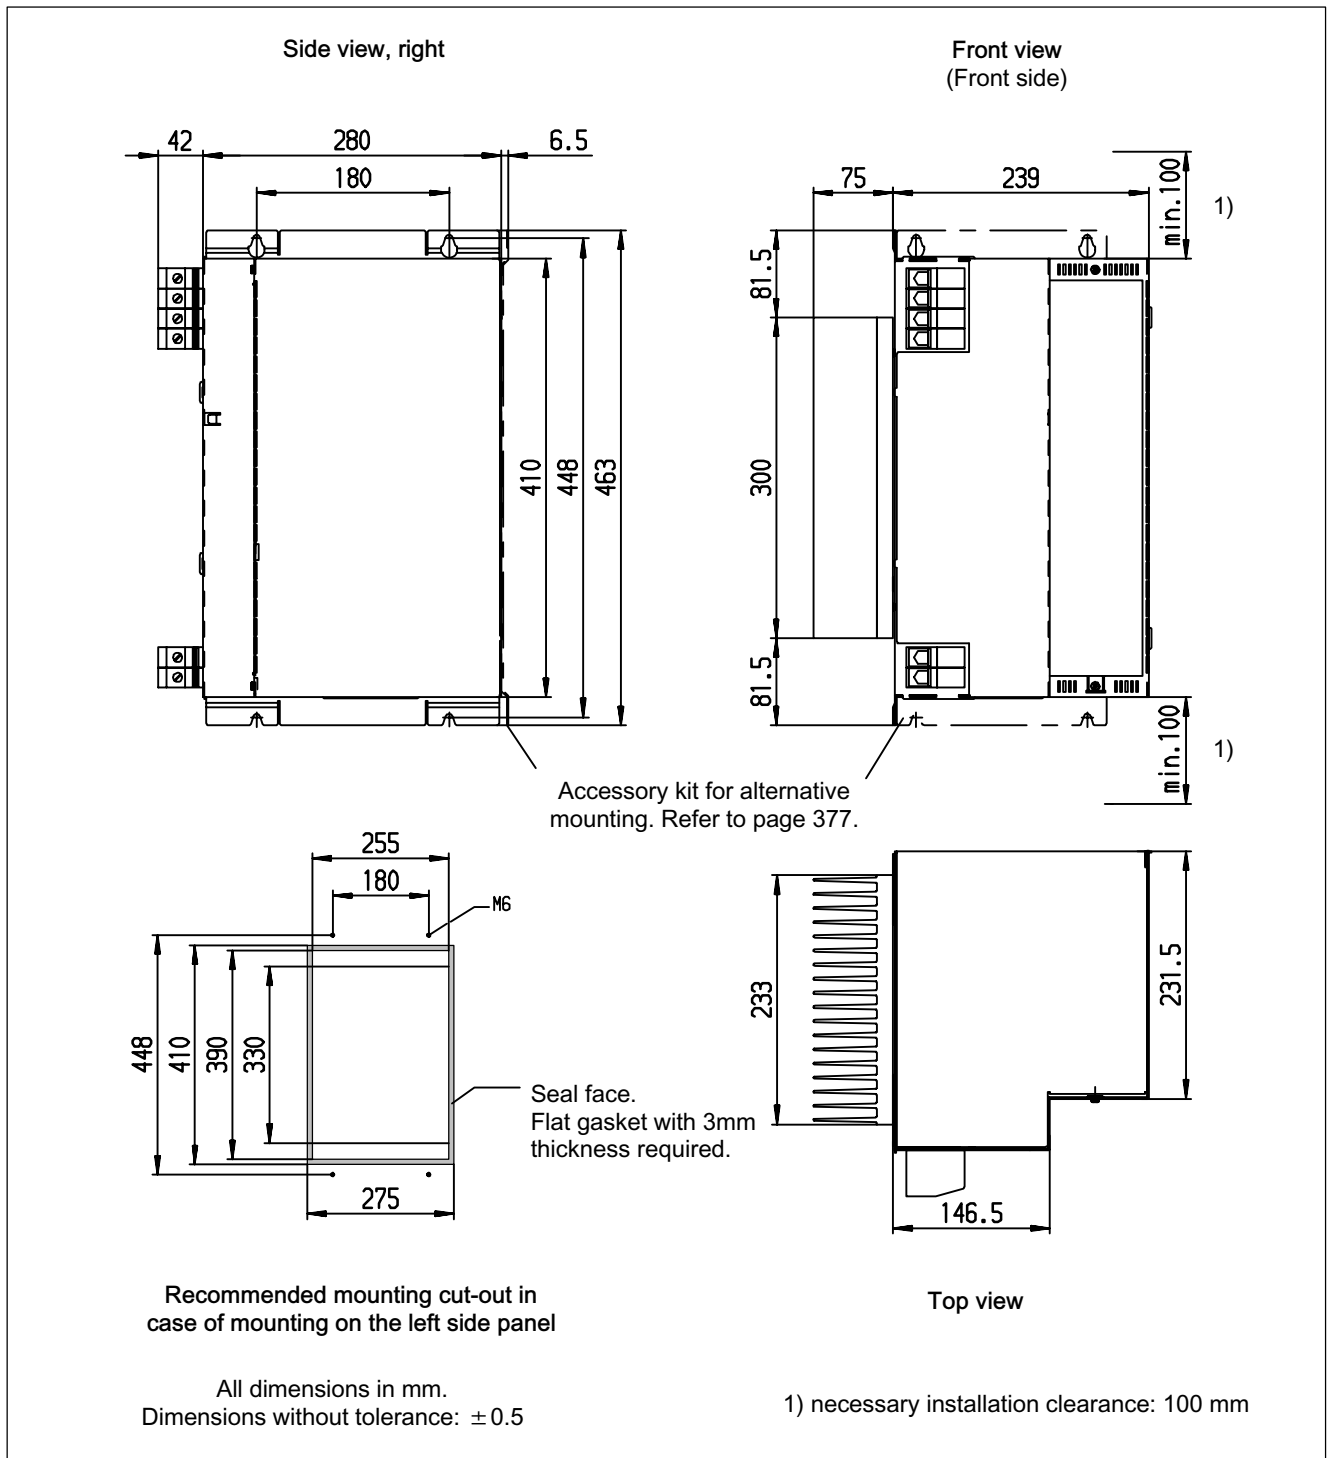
Dimensioned drawing: PSI 61xx.xxx L2
